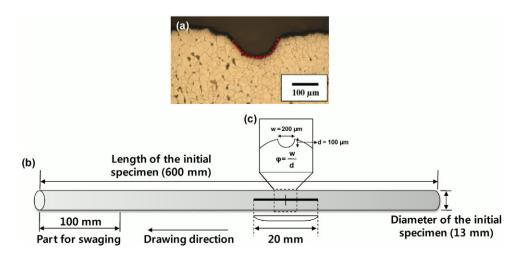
Schematic diagram of the initial surface defect and specimen: (a) surface defect represented in the literature (Kwon et al., 2009), (b) the specimen with an artificially introduced longitudinal round-type defect, and (c) a cross-sectional view of the round-type defect.
